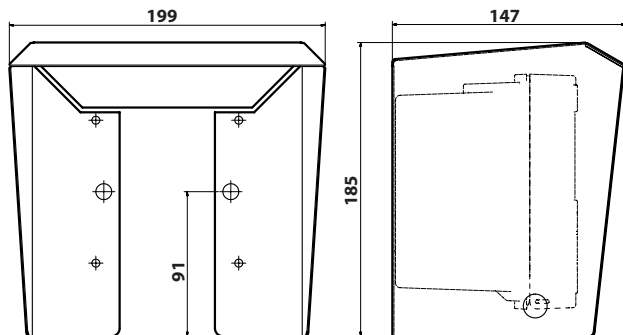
protective hood for wall and pipe mounting
